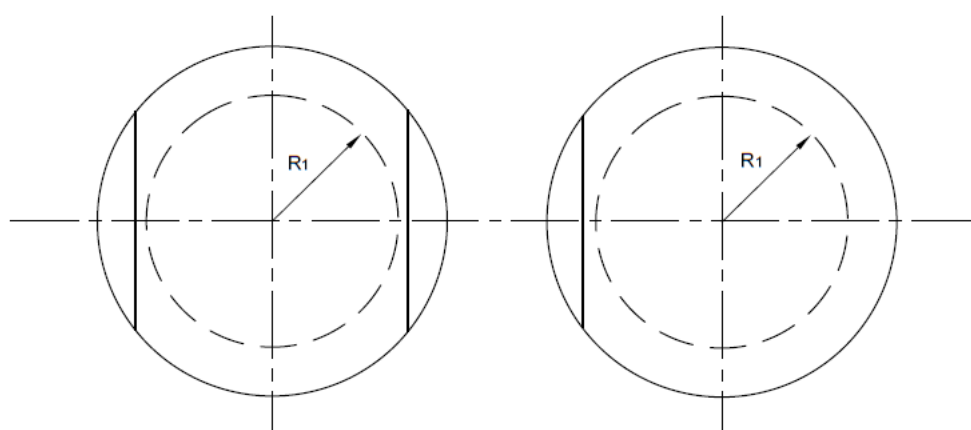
Examples of Not Permitted Weld Arrangements
